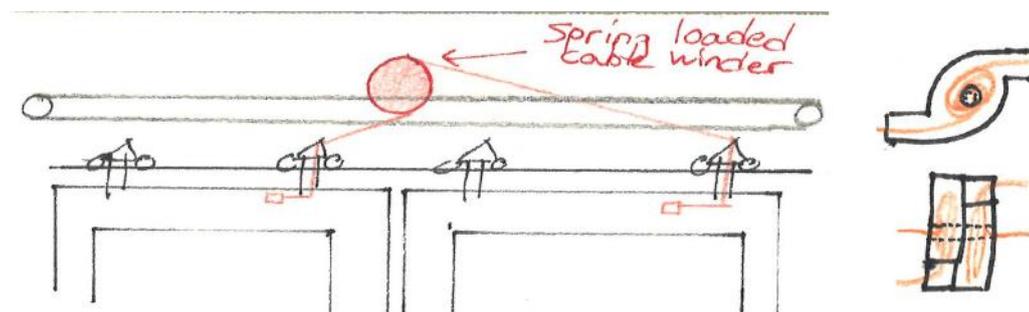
Concept 2 - Spring-loaded cable winder. A spring-loaded cable winder that always retracts cables that are connected to the door. A slip ring or similar inside the cable winder axis converts the rotating cable to a stationary cable that can be connected to a power source somewhere in the header profile. For a bi-parting door it will have two separate compartments containing one cable for each door leaf, as seen in the lower right.
